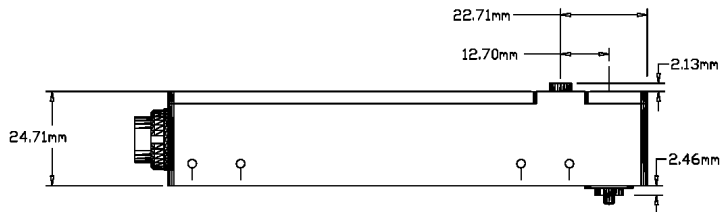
ETKS3.0_SET Dimensions - Side View, no Glenair Cover
